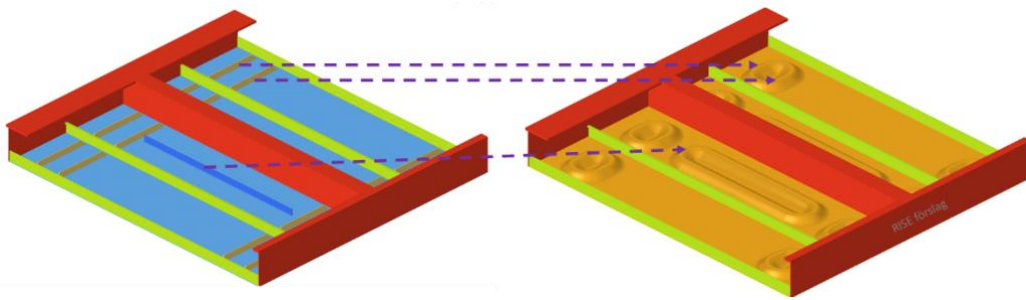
A partial section of deck with stiffeners and girder. Left: the standard setup. Right: Plate panel with locally formed region
